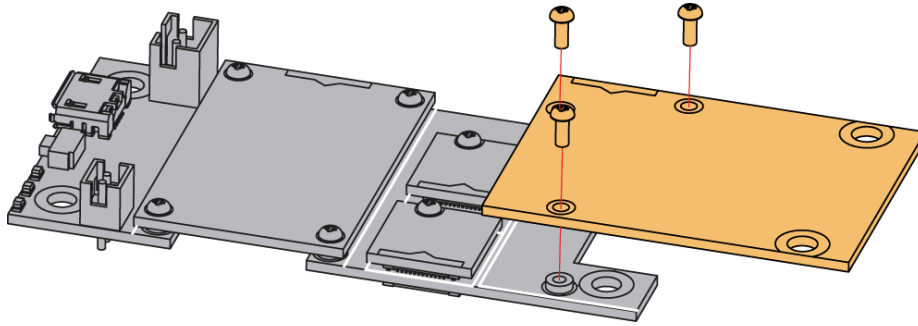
RAK12023 Mounting Mechanism on a WisBlock Base Module
